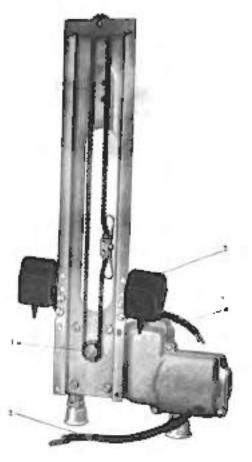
Reverse side of motor and mechanism assembly for left-band rear door
